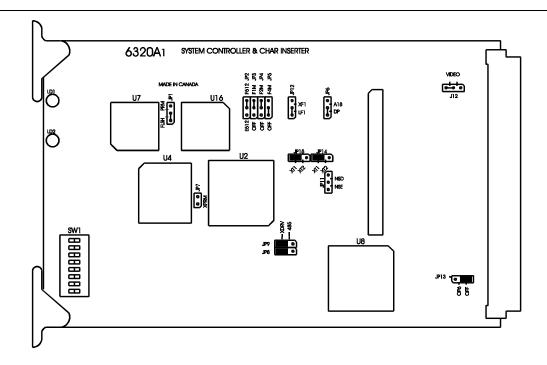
6320 Base Processor Board (632 Main Board) Default Jumpers
